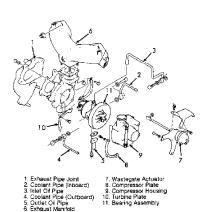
Exploded View of Turbocharger (MX-6 & 626) Courtesy of Mazda Motors Corp.
